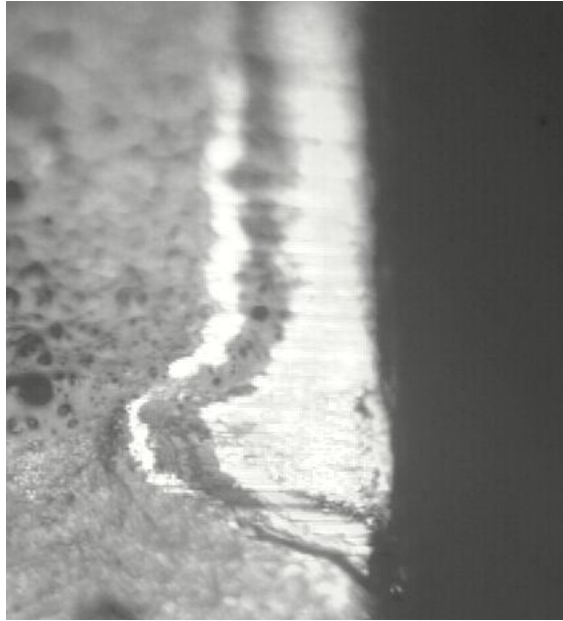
(s) The microscopic view of wear at cutting condition of at spindle speed 620 rpm, feed 0.08 mm/rev and depth of cut 1.2 mm
